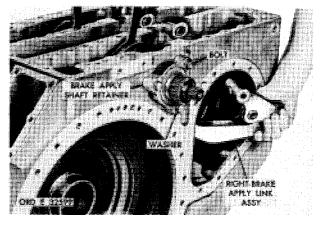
Removing (or installing) right-cam follower and brake apply link assembly
